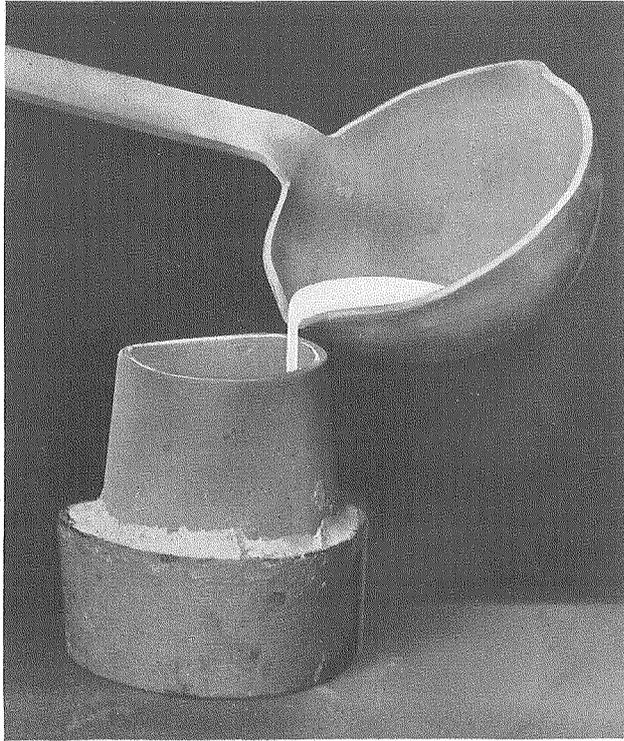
Small Ring Adjusted and Banked to Receive Additional Die Metal. Pouring the Die
